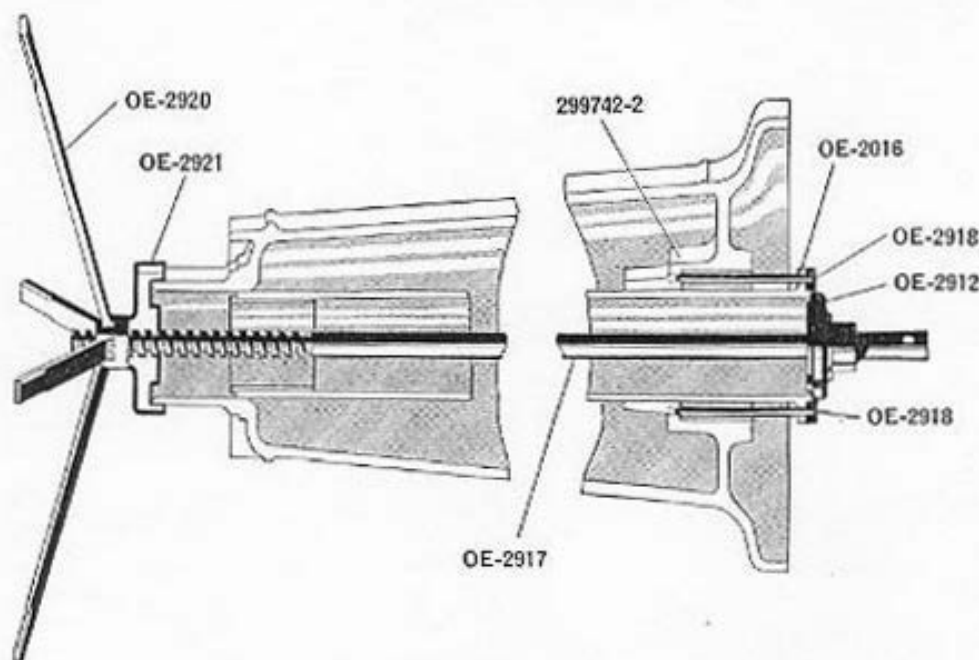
Assembling column guide bushing (OE-2016) into fixed pedestal casing (299742-2)
